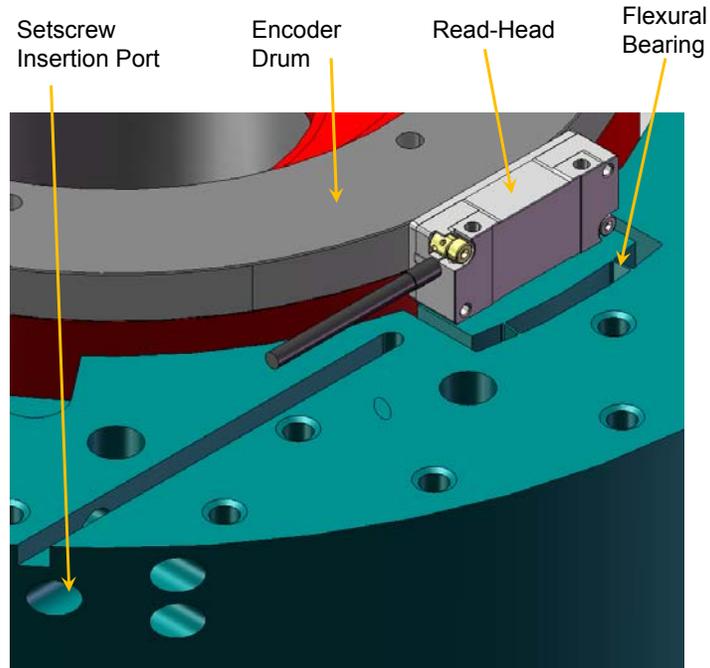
Tangential adjustment of the read-head for the ERA4282C encoder – flexural bearing method
